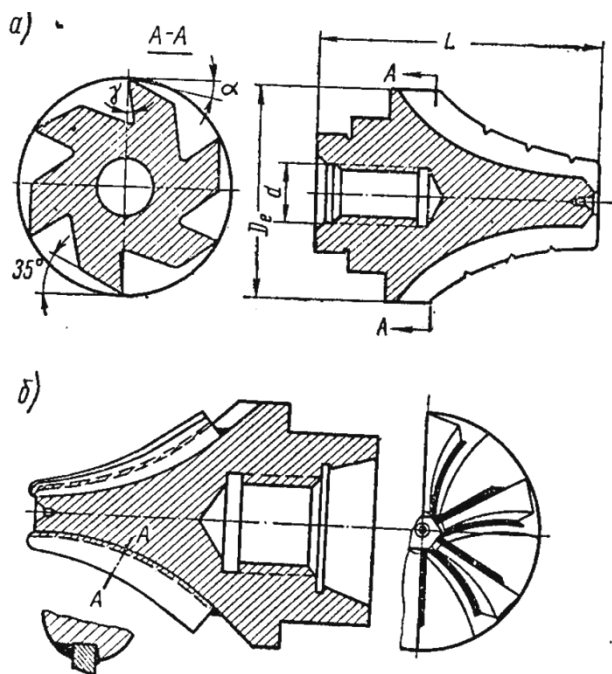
End-mill gear cutter: a – one-piece construction;
